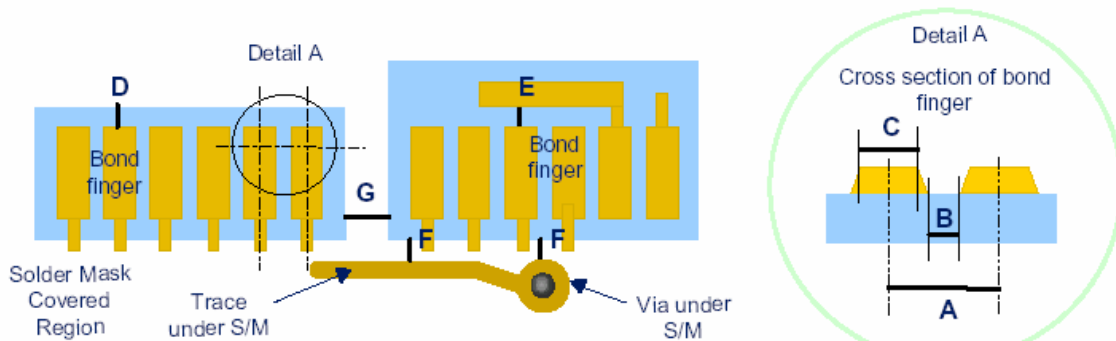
Bond Finger Design rule layout showing critical dimensions. Typical bondfinger length is 0.6 - 0.8 mm⁷.
